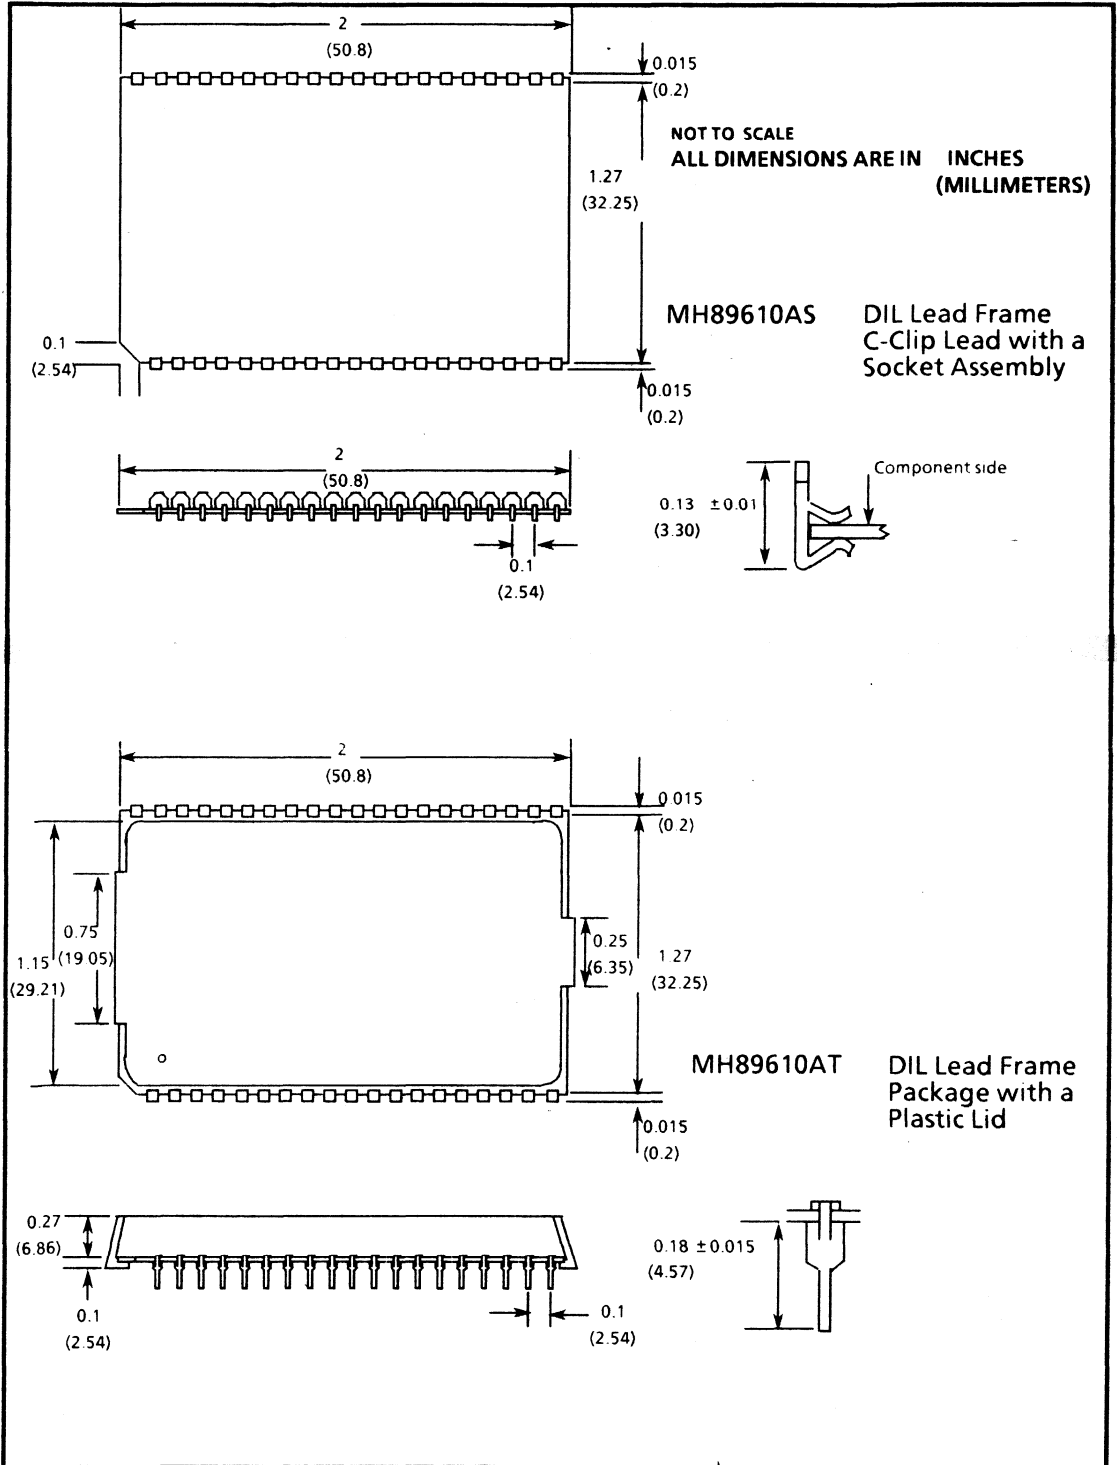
Physical Dimensions of 40 Pin Dual In Line Hybrid Package
